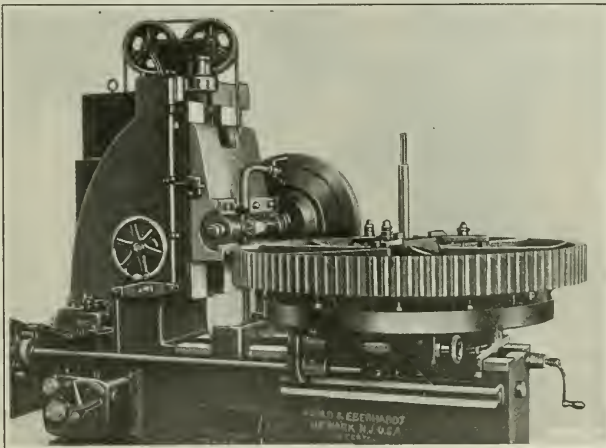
Cutting a Cast-steel Spur Gear on a Machine of the Vertical-cutting Type
